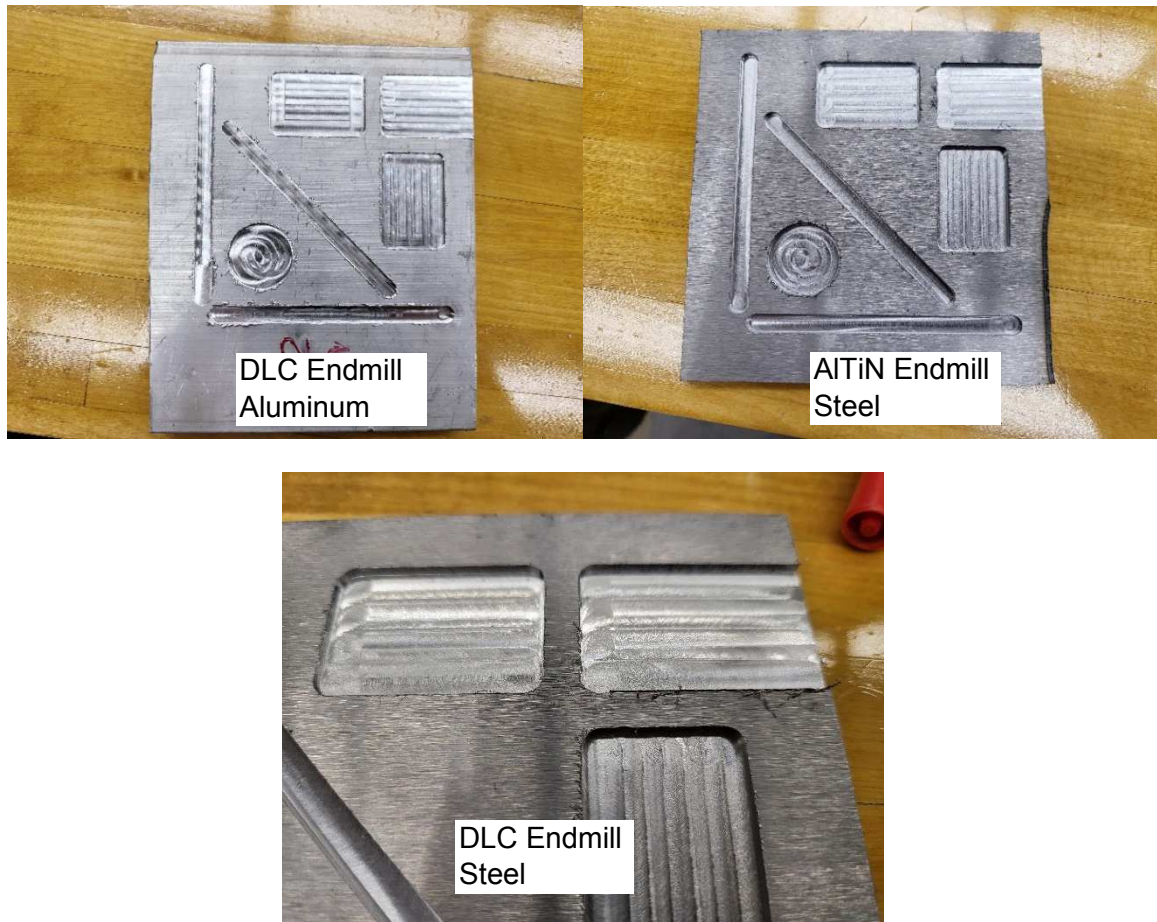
All the aluminum and steel test pieces after being machined. Note: There is no sample for the diamond endmill cutting steel because the endmill snapped.
